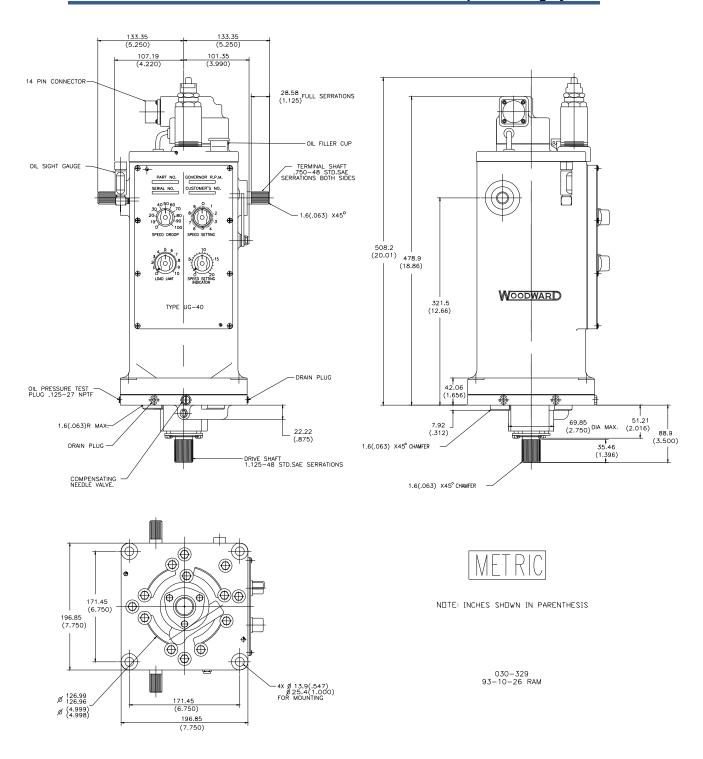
Typical Outline Drawing of UG-40D MAS Governor
